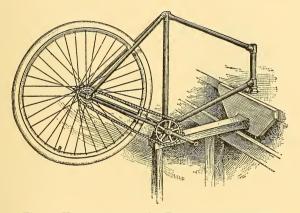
Holding a Frame for Truing the Rear Wheel.
